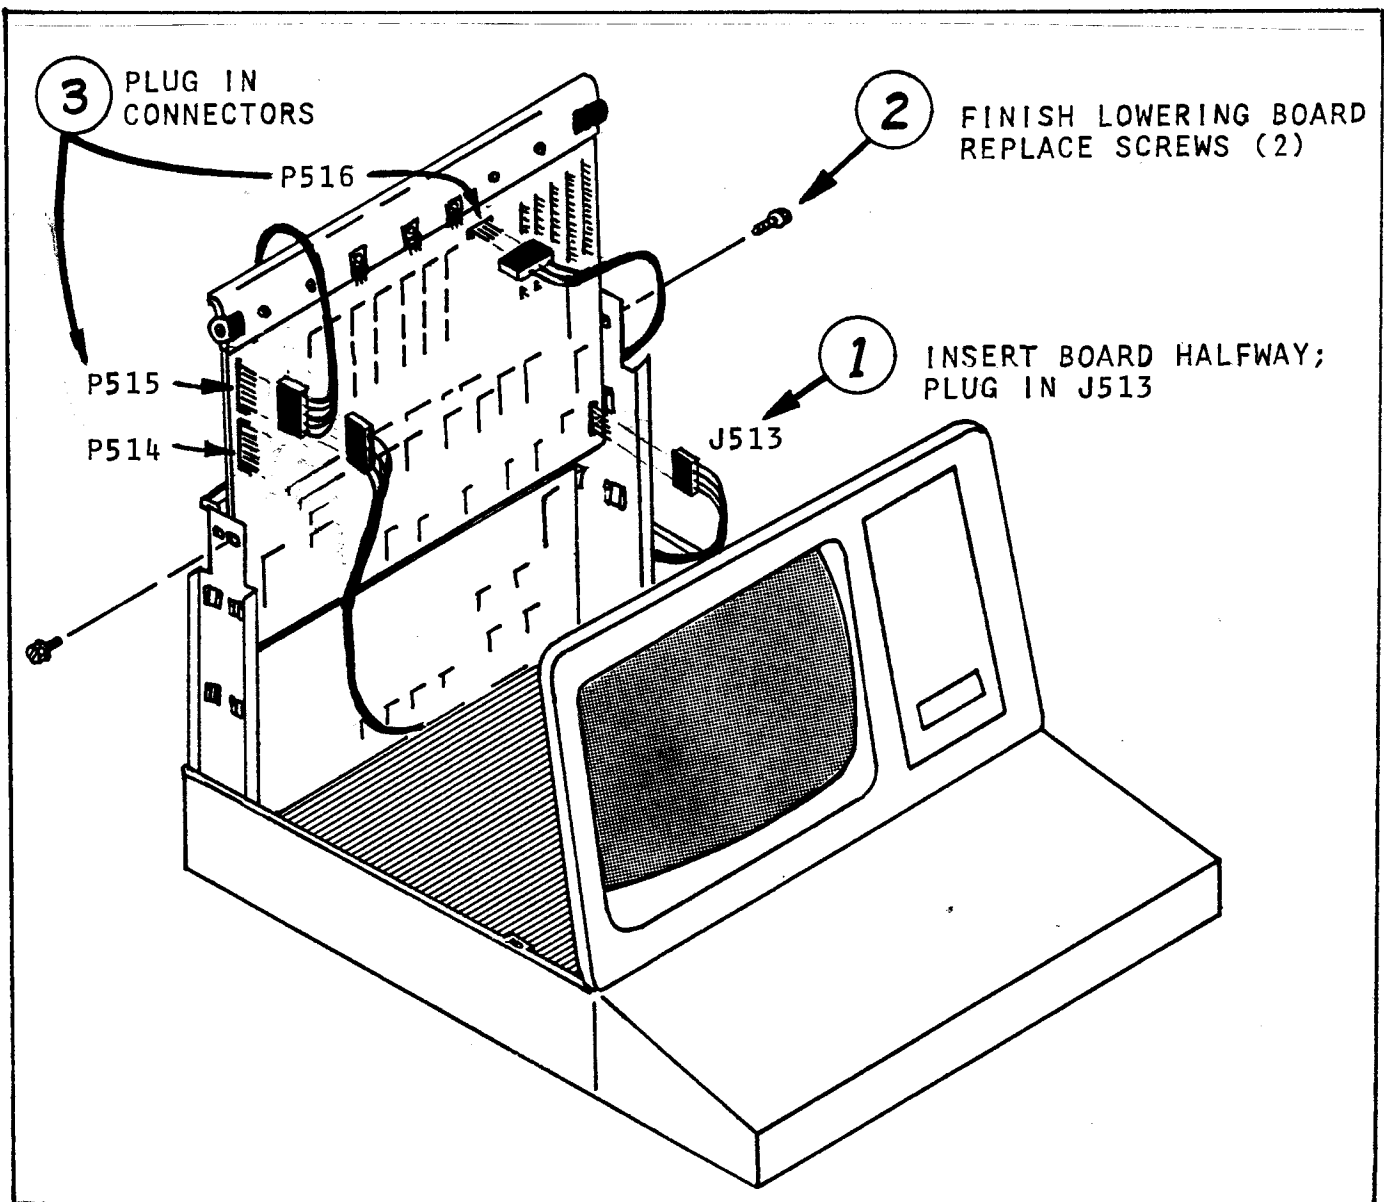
INSTALLING THE H-1000 IN OLDER H/289s
